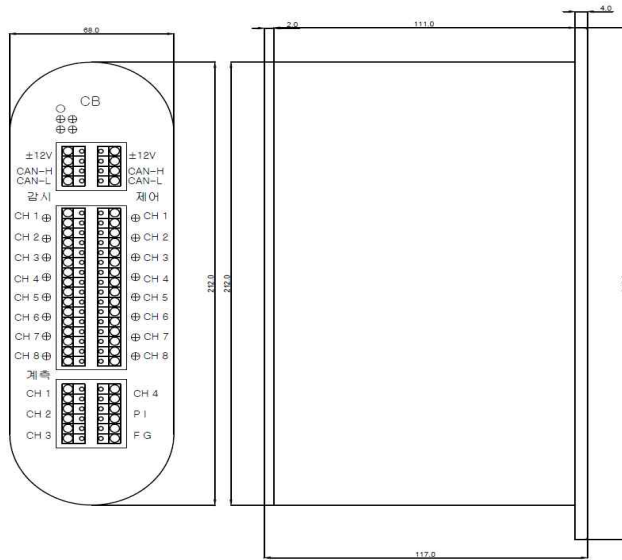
SYSTEM hardware drawing (extended I/O module)
